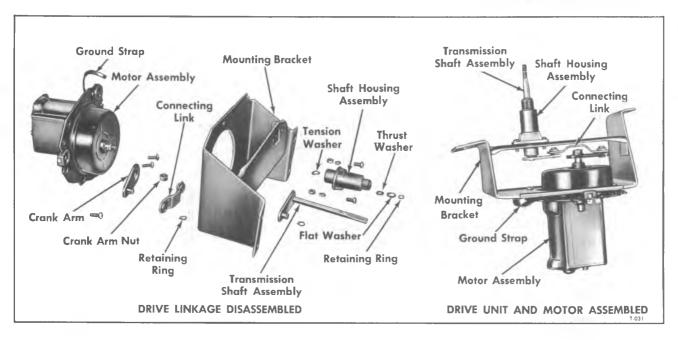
Wiper Motor and Bracket Components (Tilt Cab Model)
